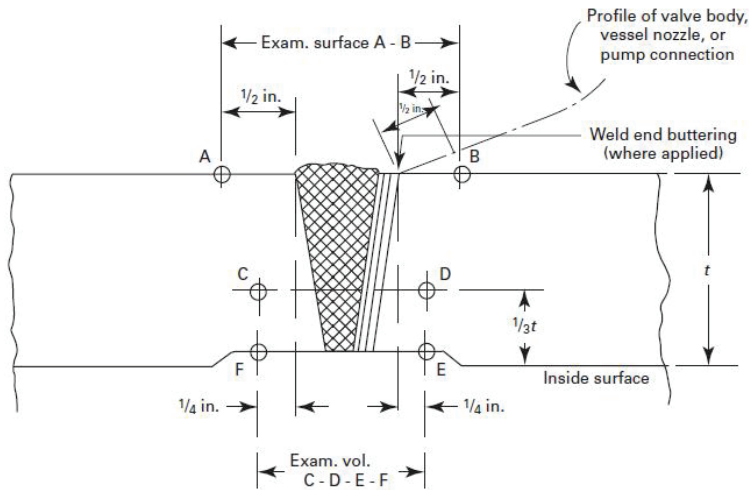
Inspection areas of similar and dissimilar piping welds according to ASME Section XI [15]
